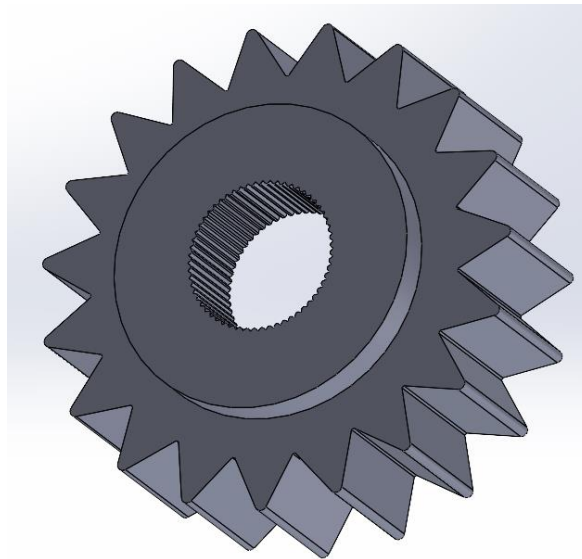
the Pincher Gear for the Robotic Arm. This is designed to be moved by a gear in which the Servo on the Claw Baseplate with turn, moving the Claw Pincher with this piece.
